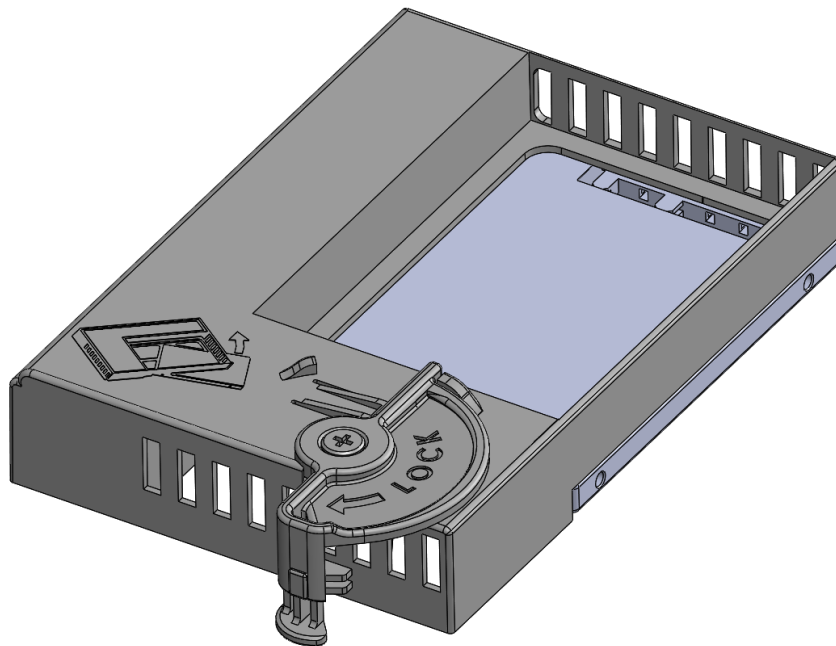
Lightning Single SSD carrier, 15mm and 7 mm
